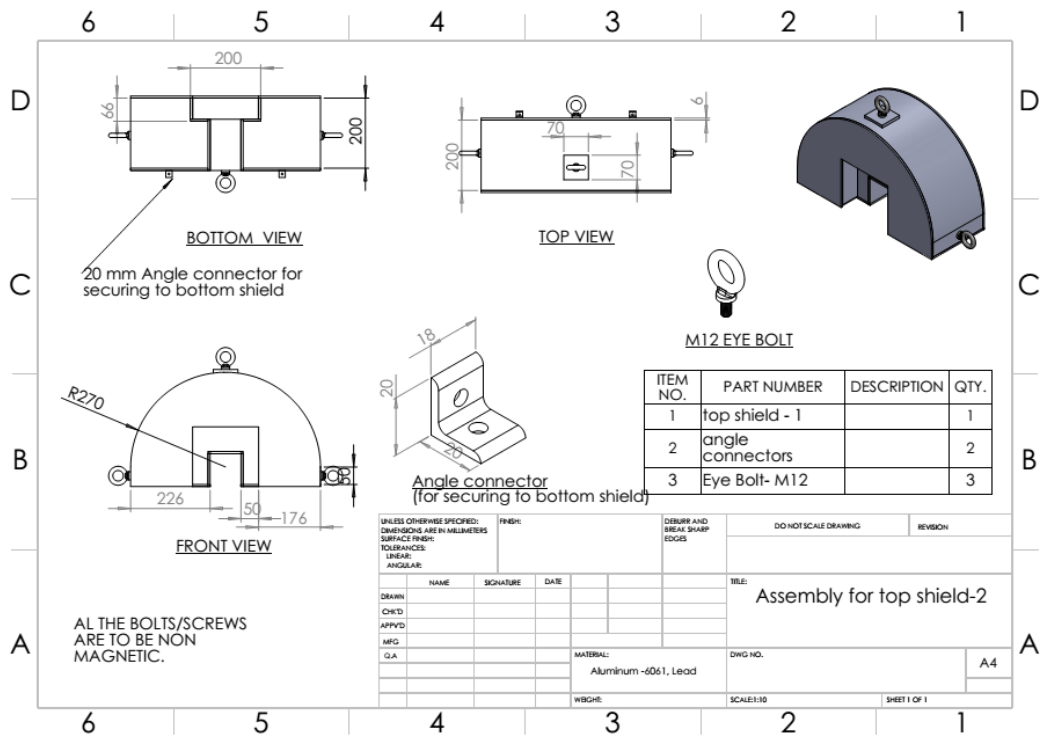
Design of Top Aluminum casing-2. The casing is made of Al-6061 alloy and the inside will be filled with lead. All the eyebolts should be removable.
